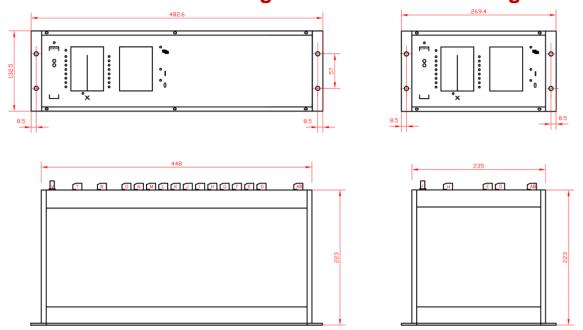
Dimensions for rack mounting of 84 HP and 42 HP single rack
